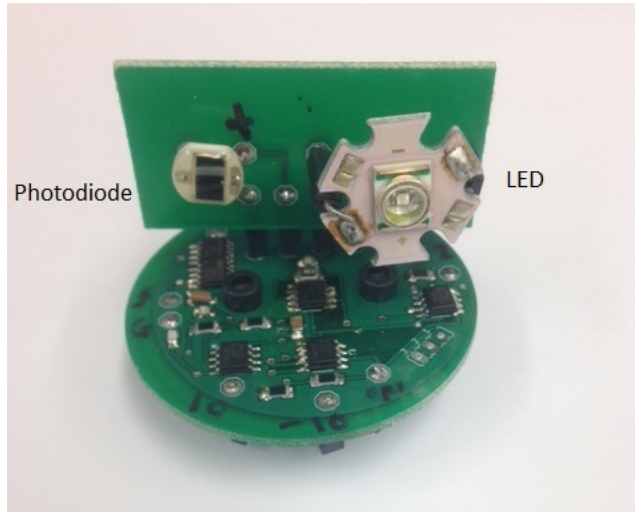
Refined transmitter/receiver circuits assembled together.
